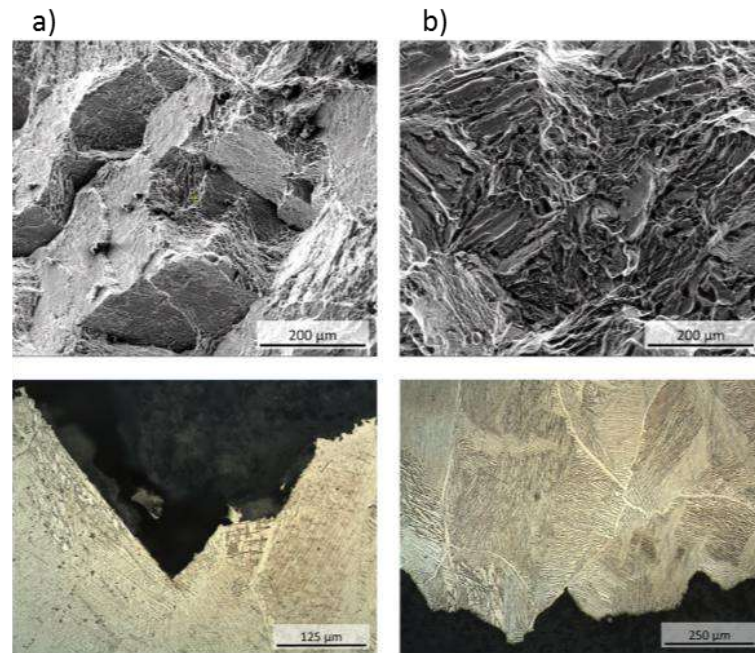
Fracture surface of specimens after heat treatment at 1040°C/30min followed by a) air cooling and b) furnace cooling [18]
